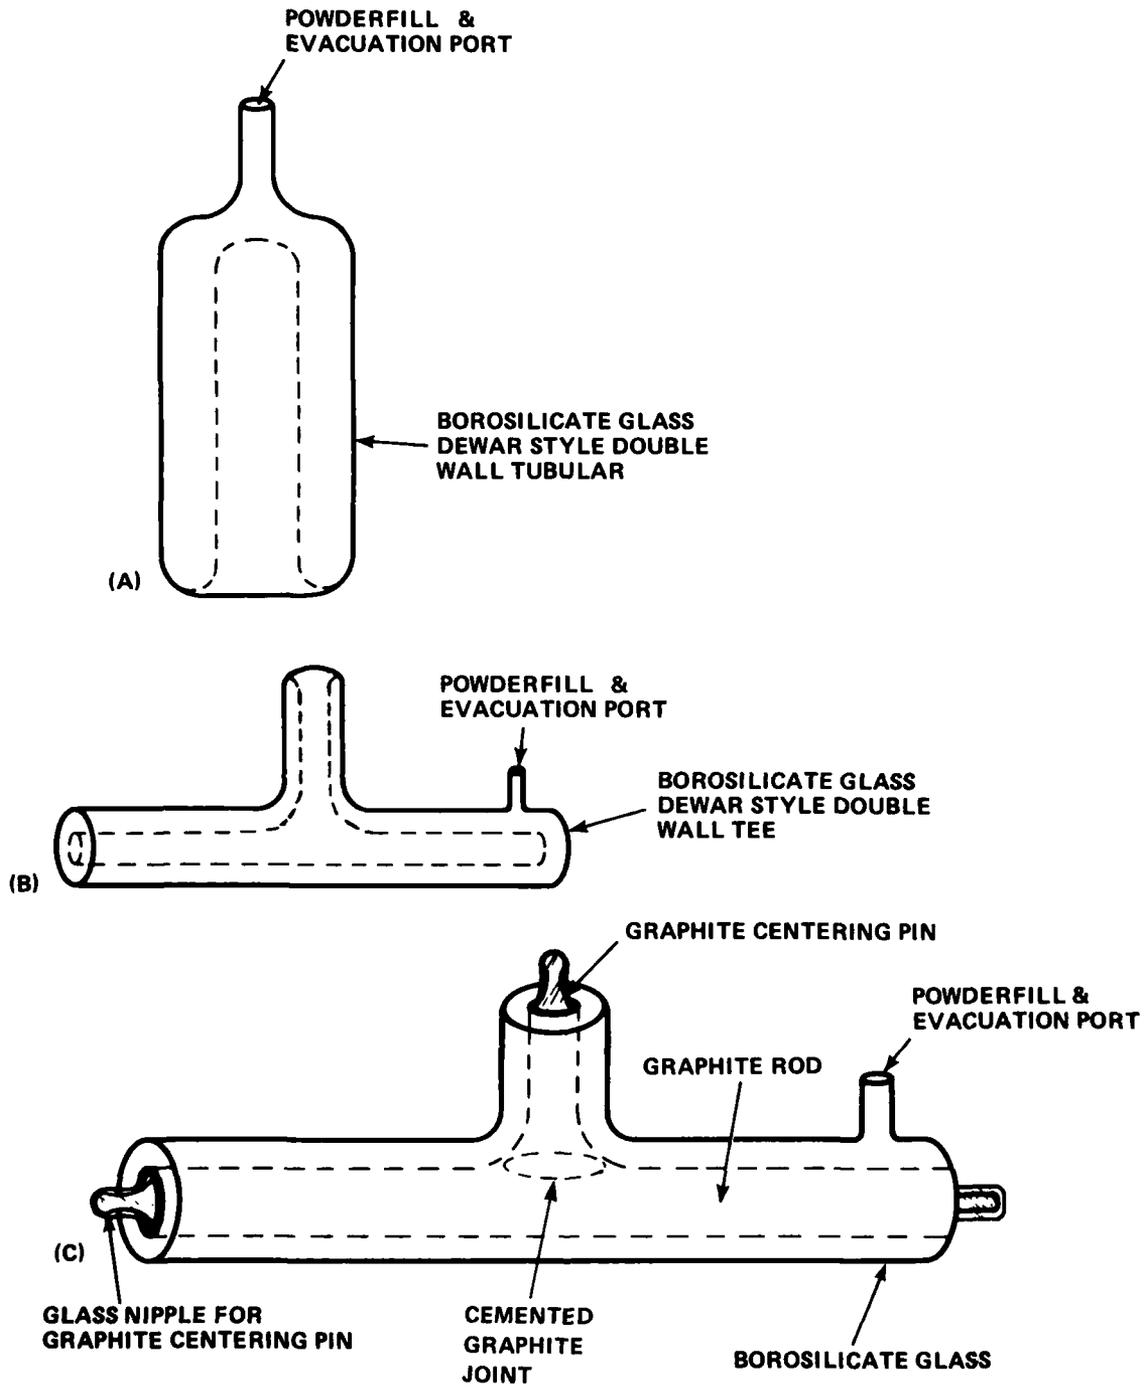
MOLD DESIGNS FOR HOLLOW SHAPES
